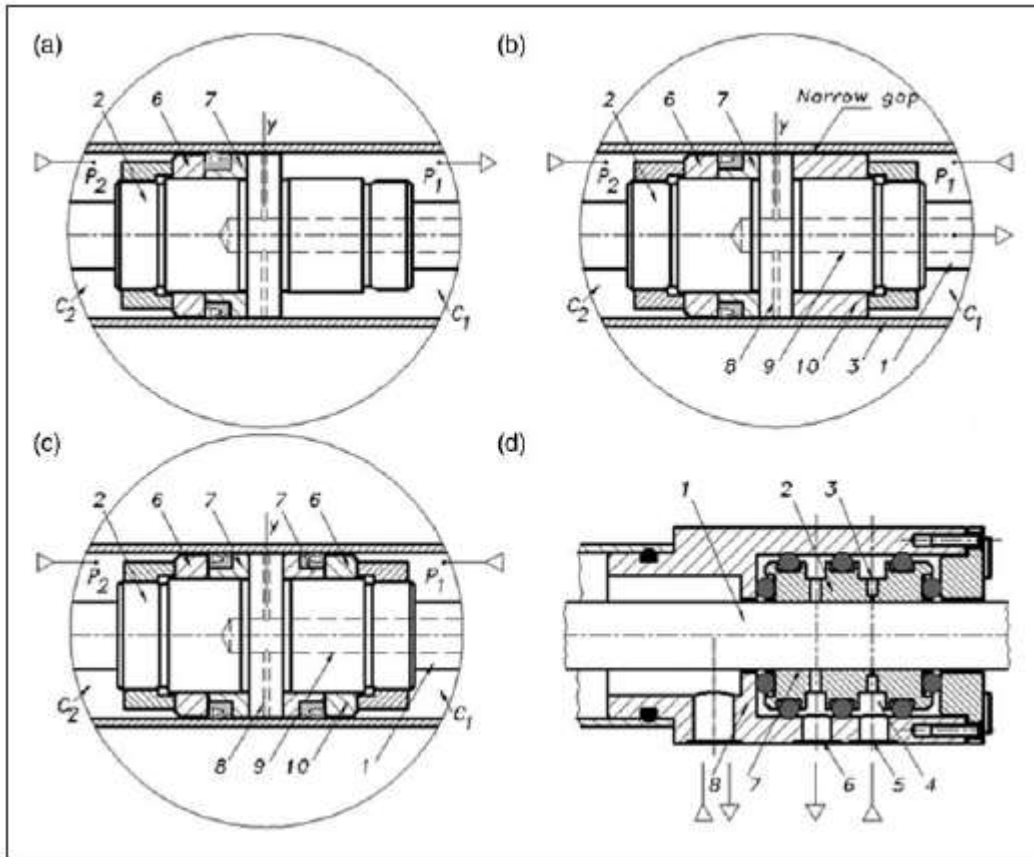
Detail of piston seal friction devices (single and double seal mounting)
